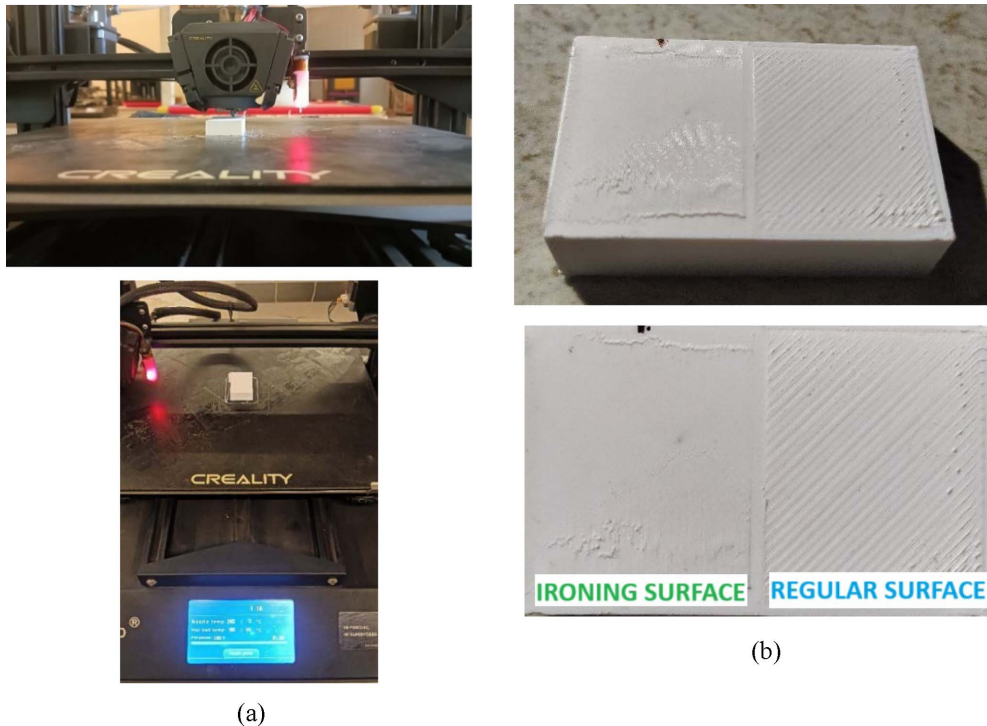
(a) Specimen Printing, (b) Printed Specimen with Ironing and Regular Surface
